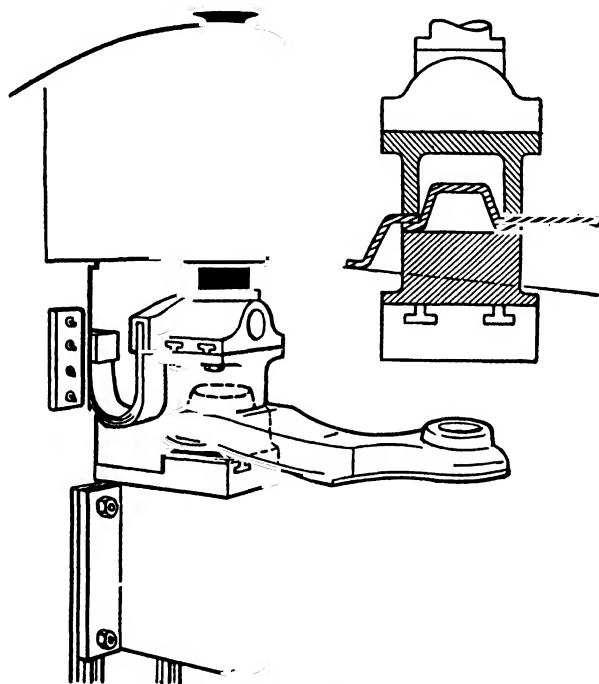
Projection welding of Nash front-end suspensions.
